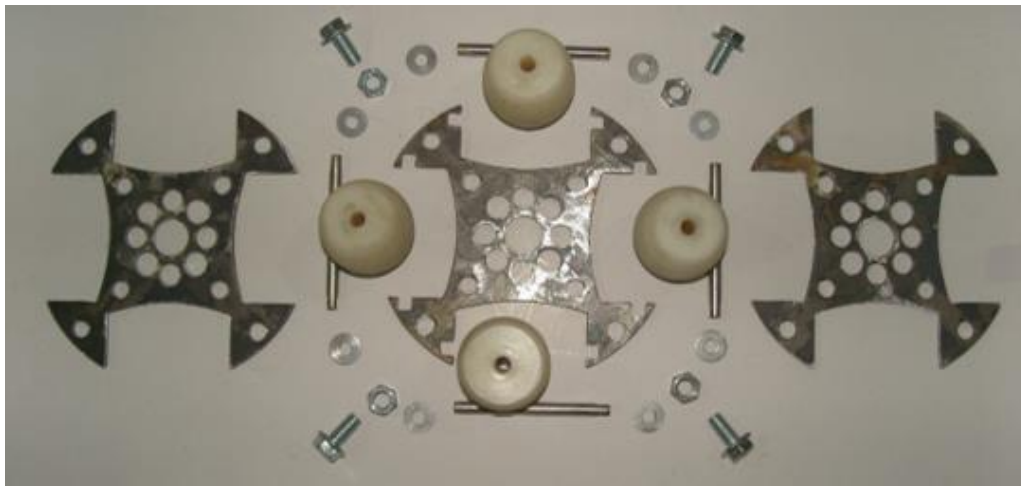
All parts needed to assemble group one of the Omni Wheel.
